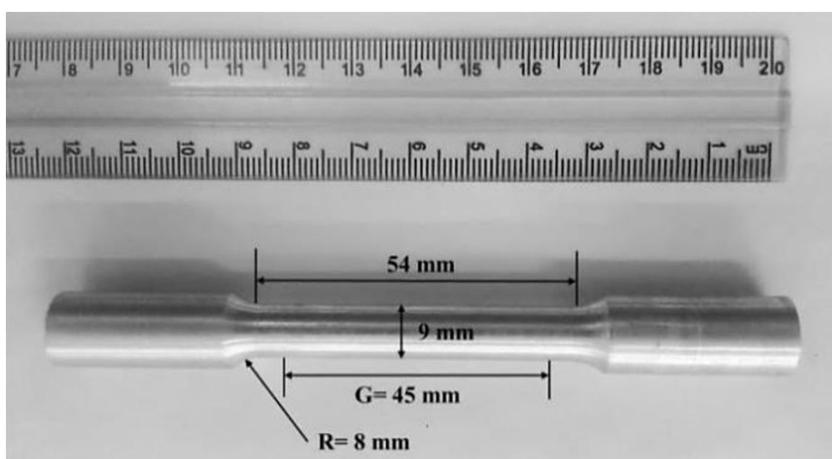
dimensions of tensile sample according to ASTM.B 557 Standard
